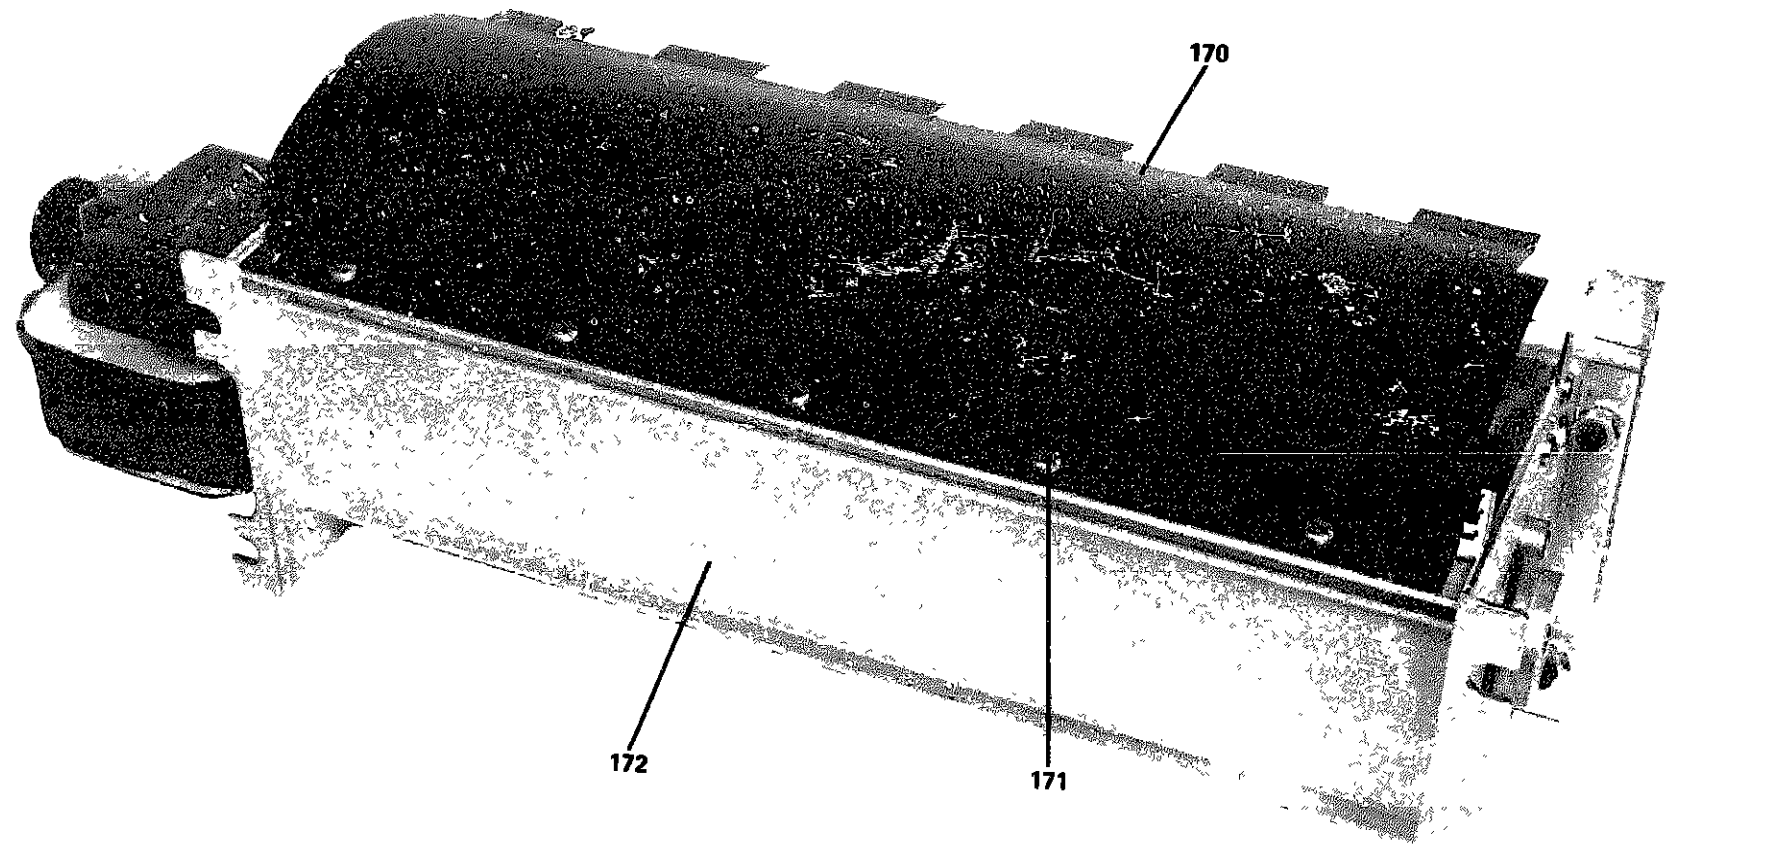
PAGE FEEDER VACUUM ASSEMBLY TOP 1A5 (SHEET 6 OF 11)
